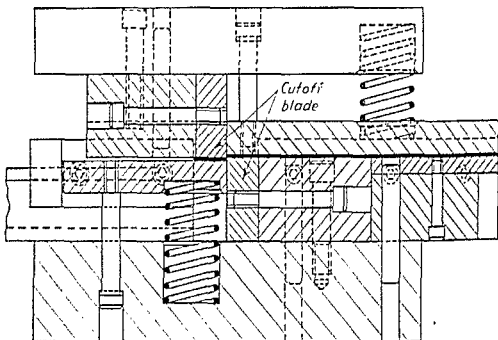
Shear-type cutoff die for use in a punch press. (Dacey Products Co., Inc.)
